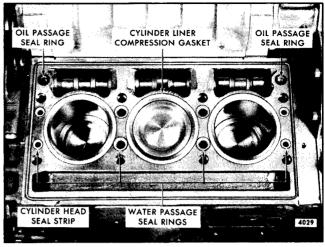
Cylinder Head Gaskets and Seals in Place on Cylinder Block
